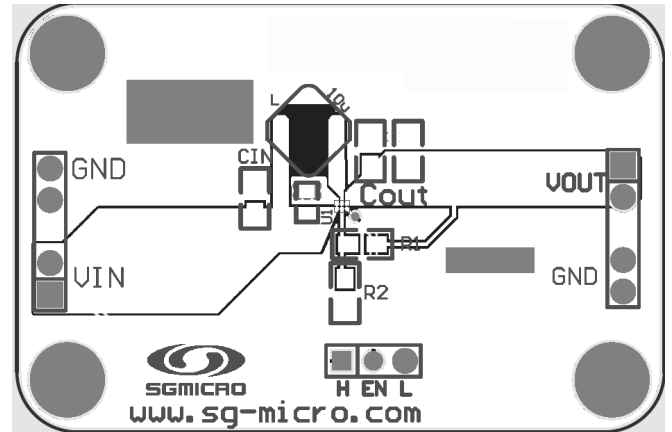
WLCSP-0.8x1.2-6B PCB Layout Example
